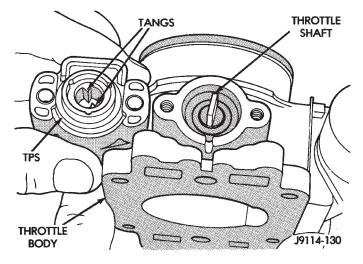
Throttle Position Sensor Installation—4.0L Engine
